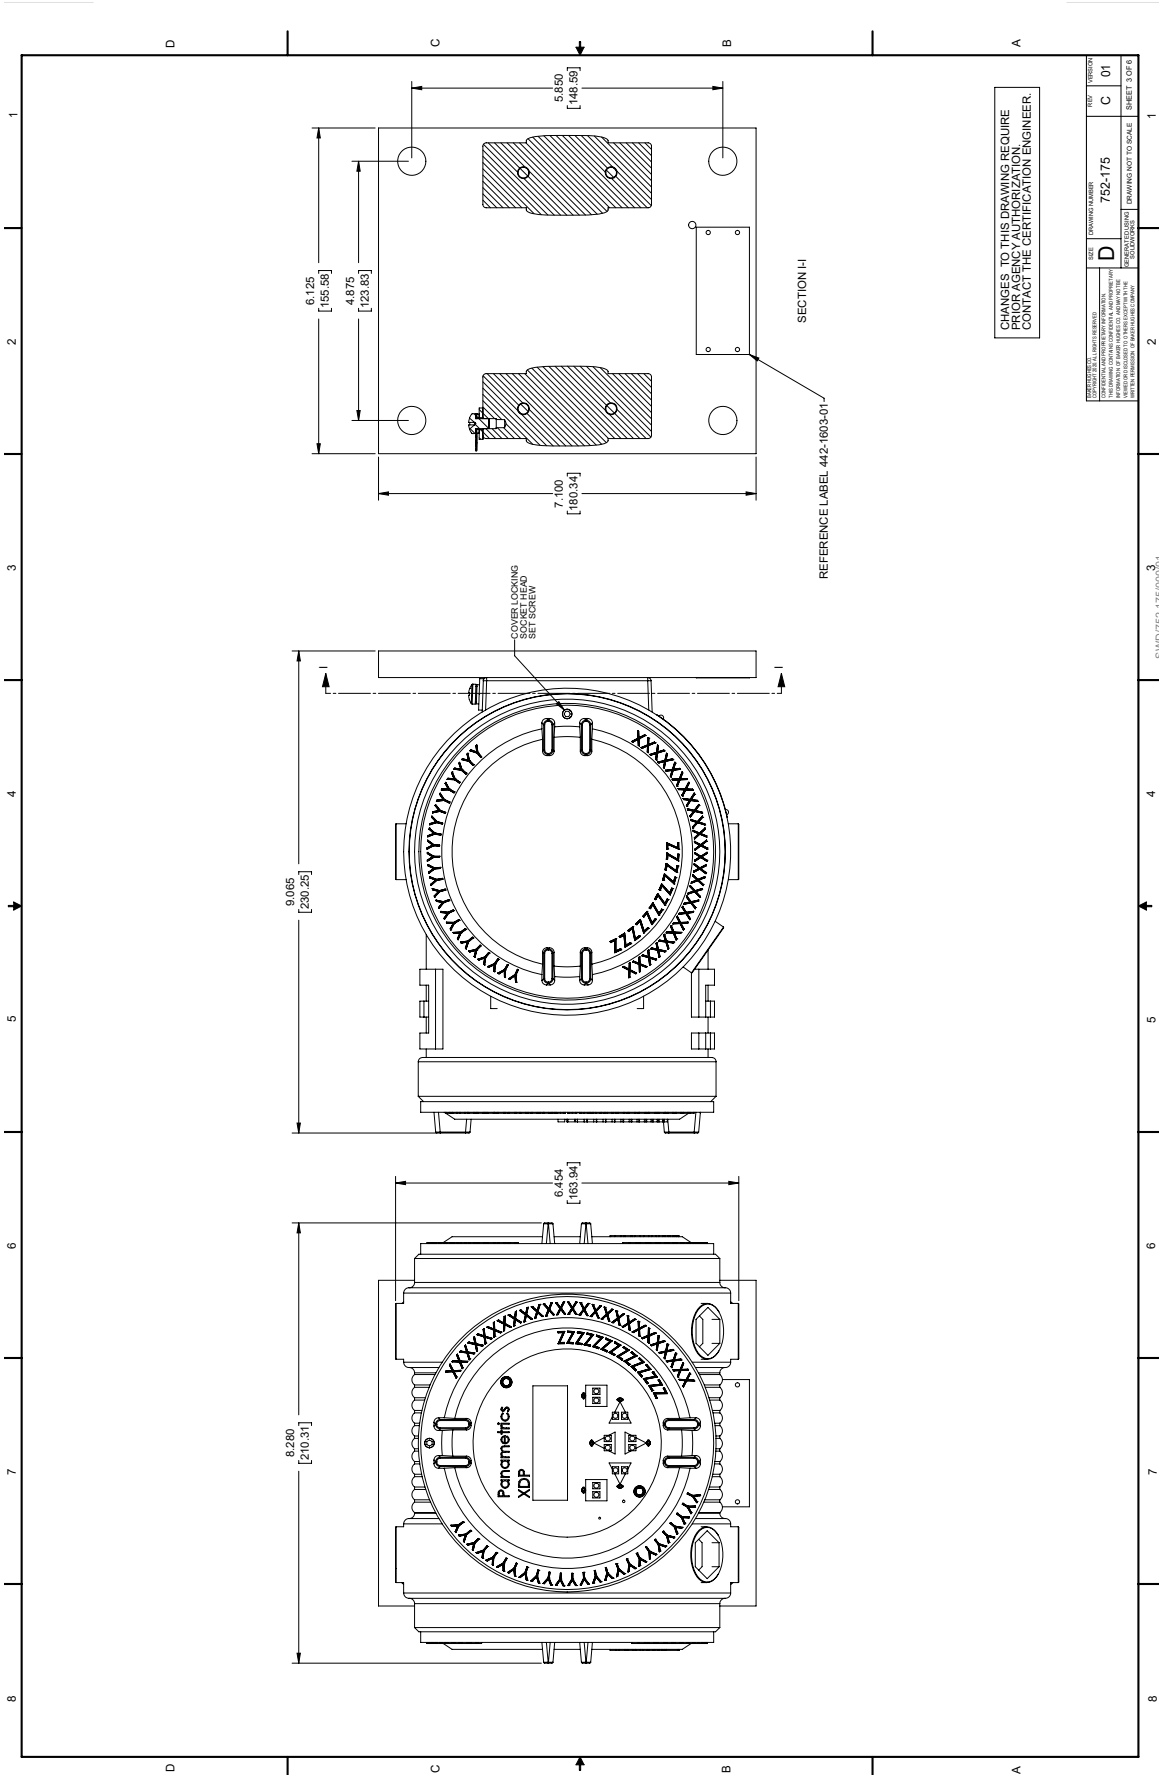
XDP certification drawing, Cenelec (752-175revA, sheet 3 of 6)
